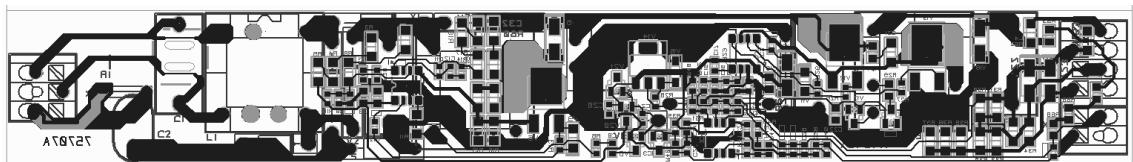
LL1x23-80-E-CC production PCB 75707A design with component, bottom copper and bottom solder resist photo layers.
